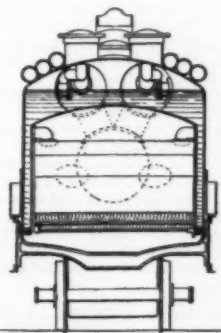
TRANSVERSE SECTION THROUGH THE FIRE BOX.
